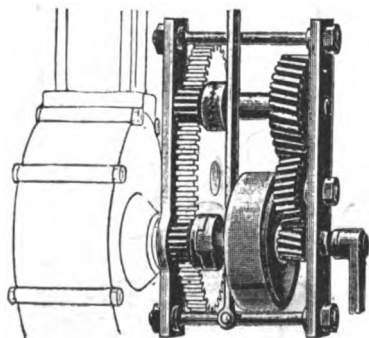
VIEW OF TWO-SPEED GEAR.
